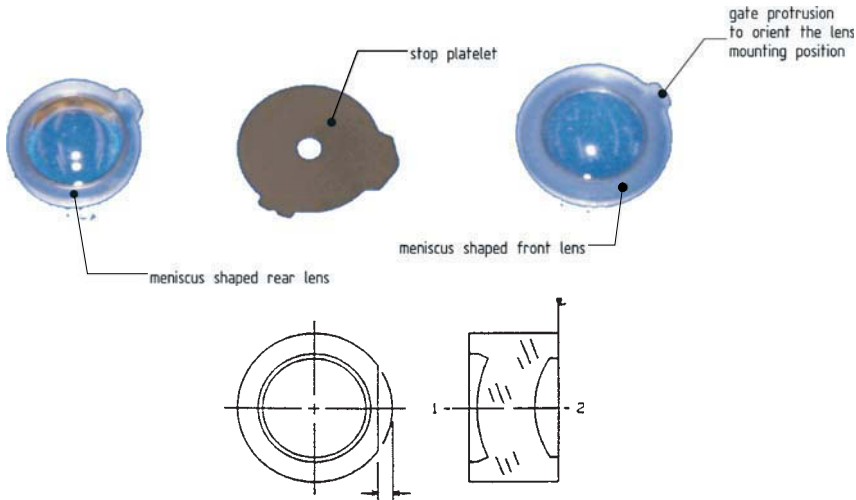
Top: components of the objective lens system of a single-use camera consisting of a meniscus-shaped rear lens, a stop platelet made of steel, and a meniscus-shaped front lens. Note the mounting flange and the gate protrusion to orient the lens mounting
